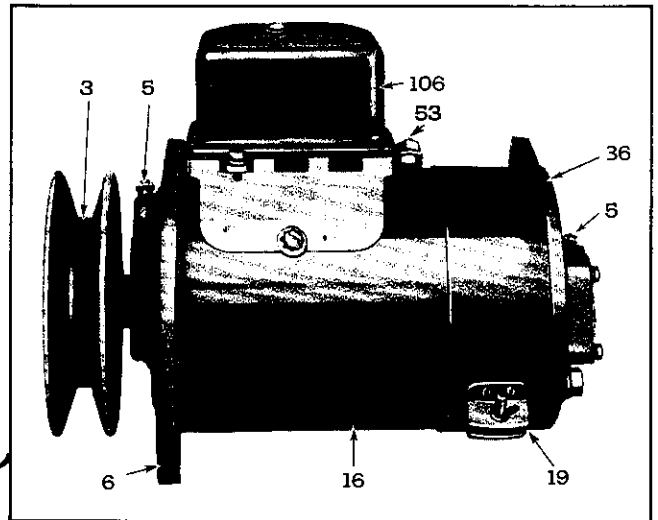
Battery Charging Generator with Drive Pulley and Step Voltage Control Unit Attached
